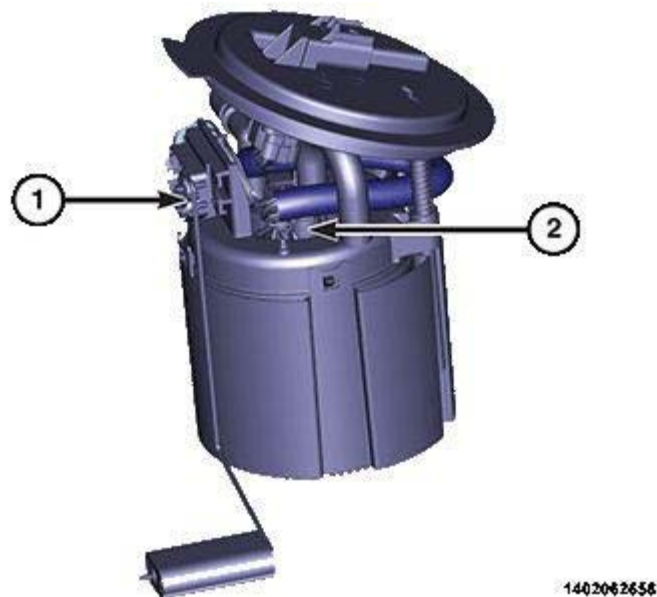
Fuel Level Sending Unit & Wire Harness Connector
